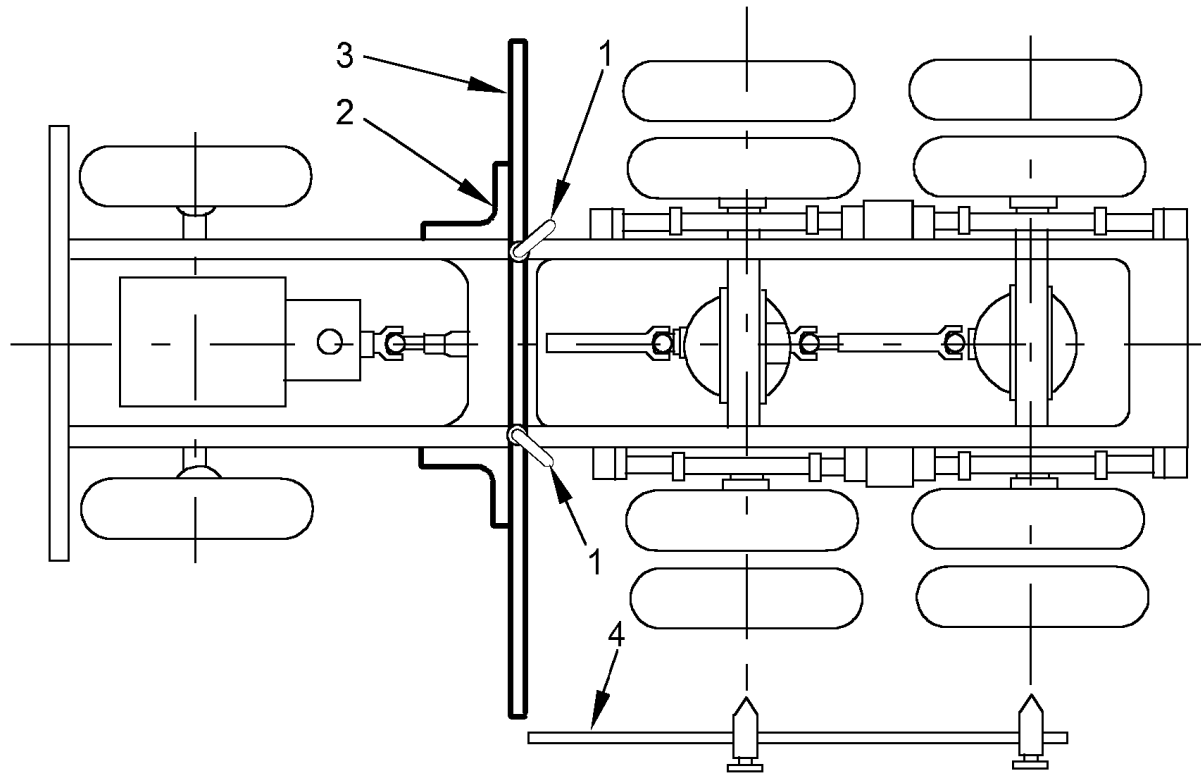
Check Dimension On Opposite Side Of Rear Axles, Within 1/8 Inch
